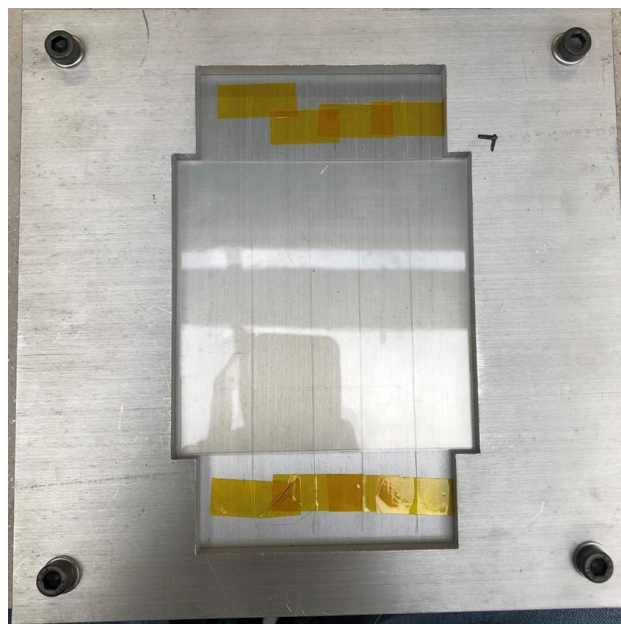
PP sheets and fibres placed in the mould prior to placing top plate.
